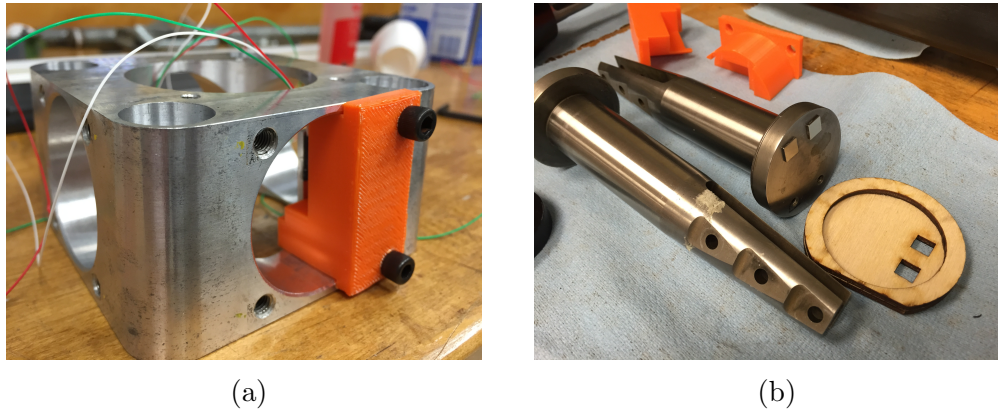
Jigs for pitch angle sensor construction (a) Rapid prototyped fixture for Hall effect mount (b) Laser cut magnet locating jig with blade grips
